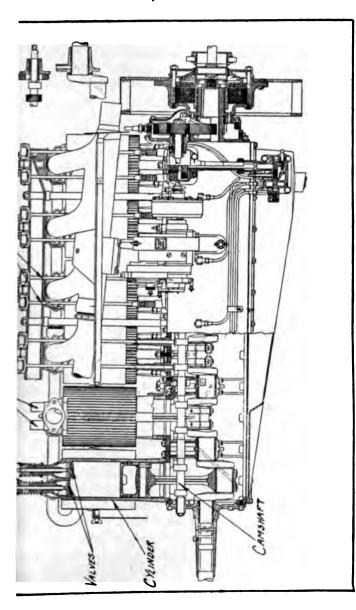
Part Sectional View of the Franklin Six Cylinder Air Cooled Engine, Showing Unconventional Valve Installation. ried in cages which are readily removed from the cylinder had by unscrewing the retention nut that keeps the valve cage tight pressed against the seating at its lower end to obtain a gas-tight joint. The valve cages are easy to handle and it is a relative simple operation to compress the valve spring and remove the pi which makes for easy removal of the valve. When this construction is followed it is possible to grind in the valve by simply removing the cage assemblies from the cylinder. It is not necessate to disturb the cylinder in any way and does not call for disconnection of intake or exhaust manifolds; the only things that not be removed are the valve operating tappets, which is work of by a few moments.
